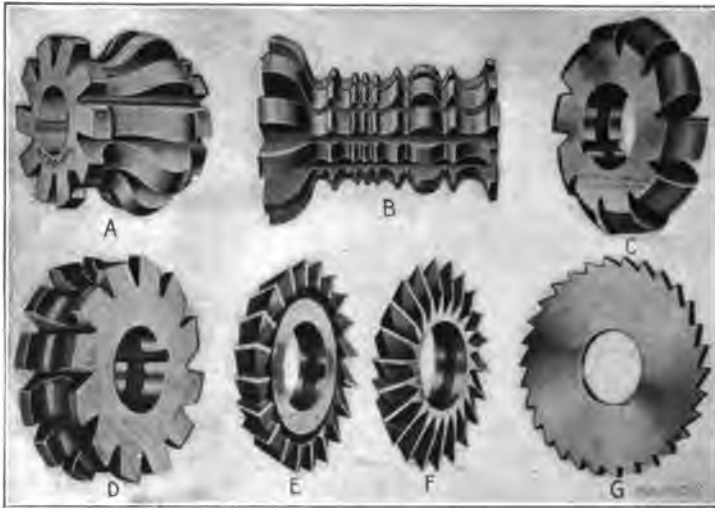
Formed Cutters, Angular Cutters, and Slitting Saw
